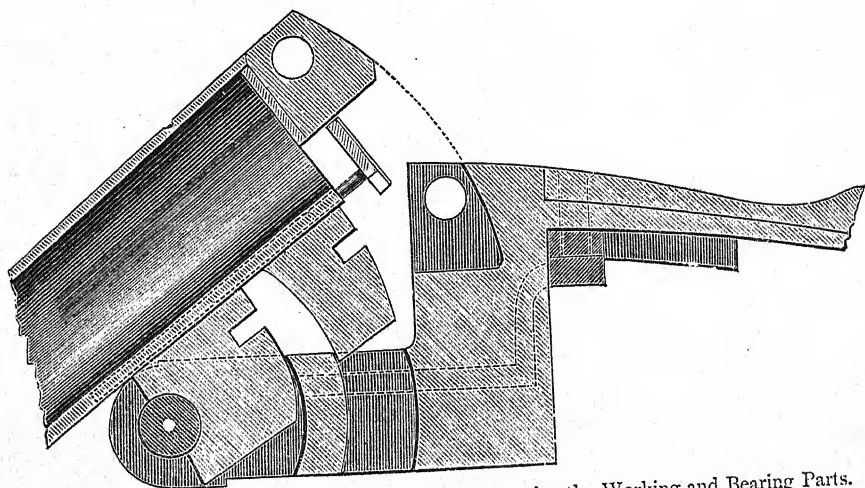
Section of Hammerless Breech-Action, showing the Working and Bearing Parts.
